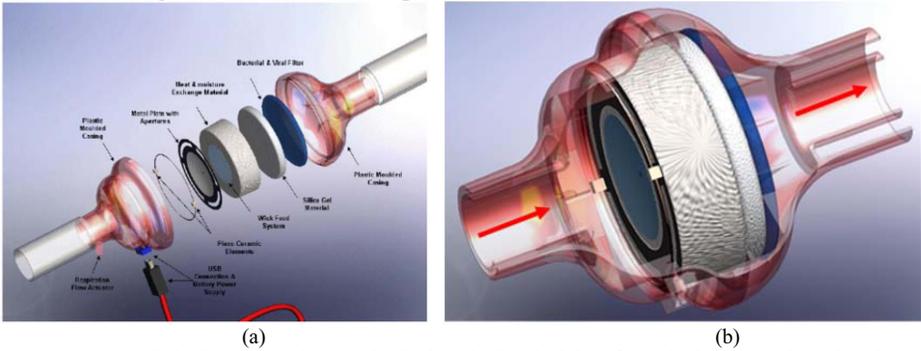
Humid device (a). Units, mechanical and electrical interfaces including casing, (b). Overall assembled structure
